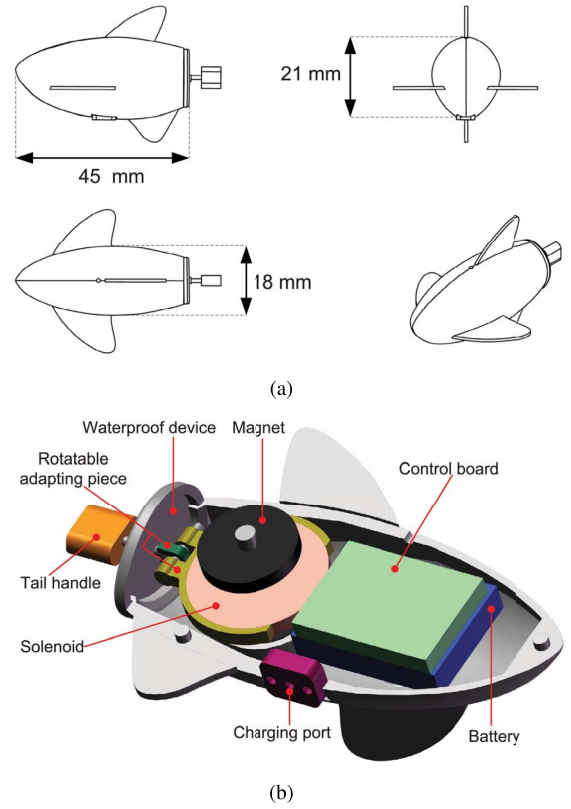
Mechanical design of the conceived miniature robotic fish. (a) CAD drawing. (b) Mechanical structure.
